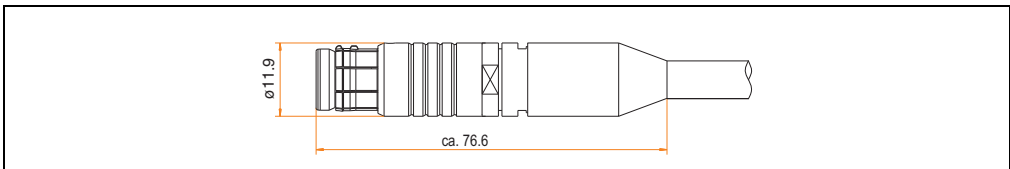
Plug dimensions (ODU Minisnap) - SDL cable 5CASDL.0xxx-20 Rev. < A5
